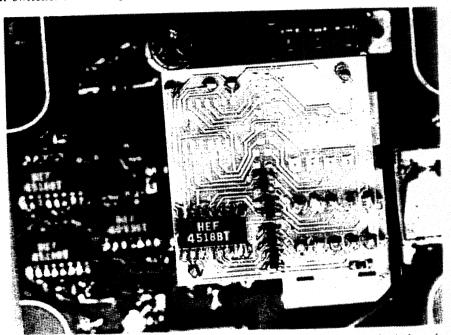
A closer view of the small printed circuit board. A dual decade counter (HEF 4518), 4 dual diode array chips, and a chip resistor are visible.
